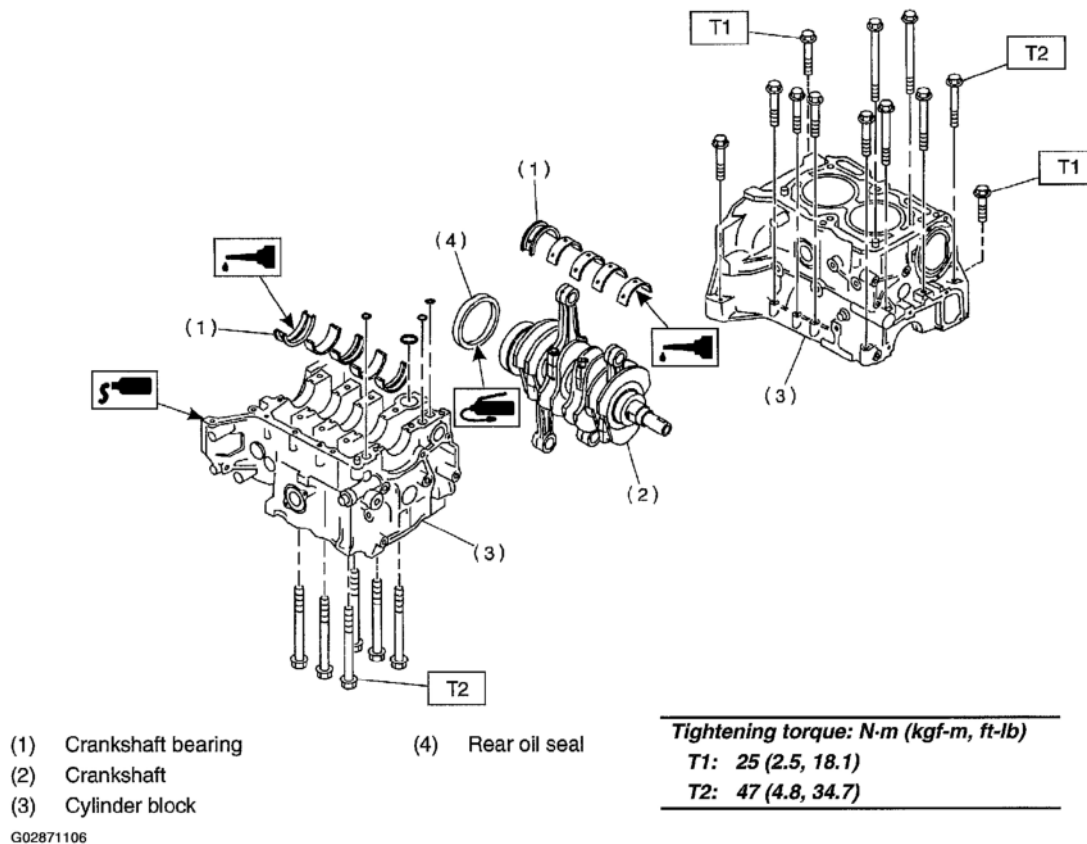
Installing Left-Hand And Right-Hand Cylinder Blocks
